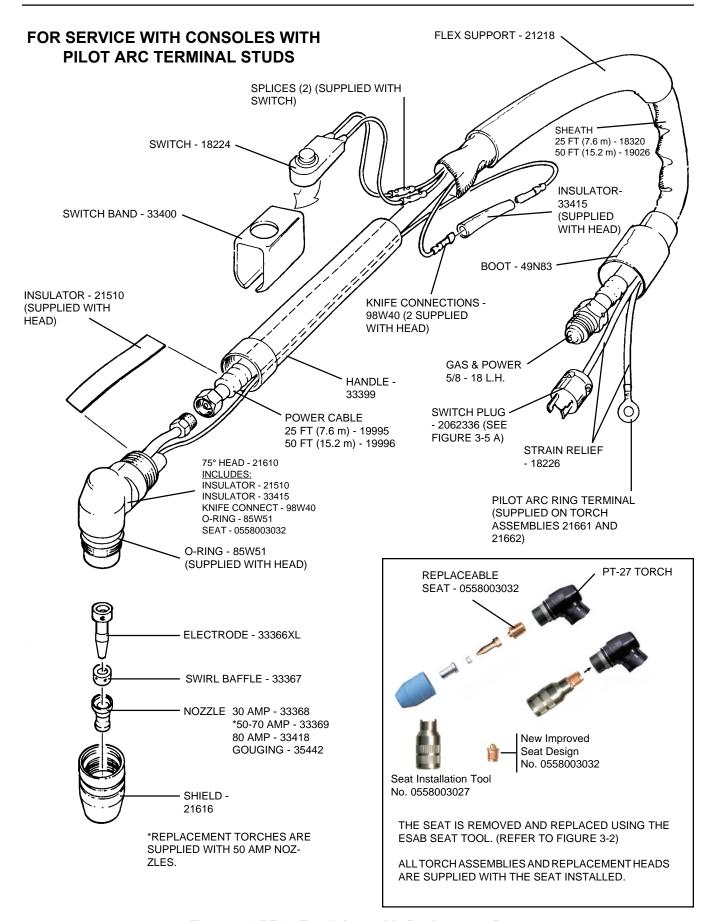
PT-27 Torch Assembly Replacement Parts
